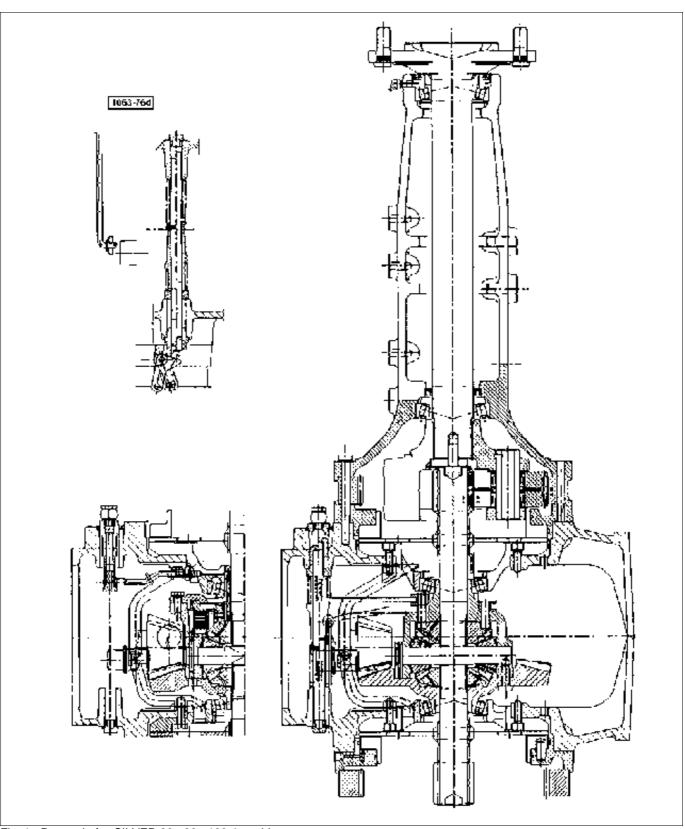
Rear axle for SILVER 80 - 90 - 100.4 machines.
